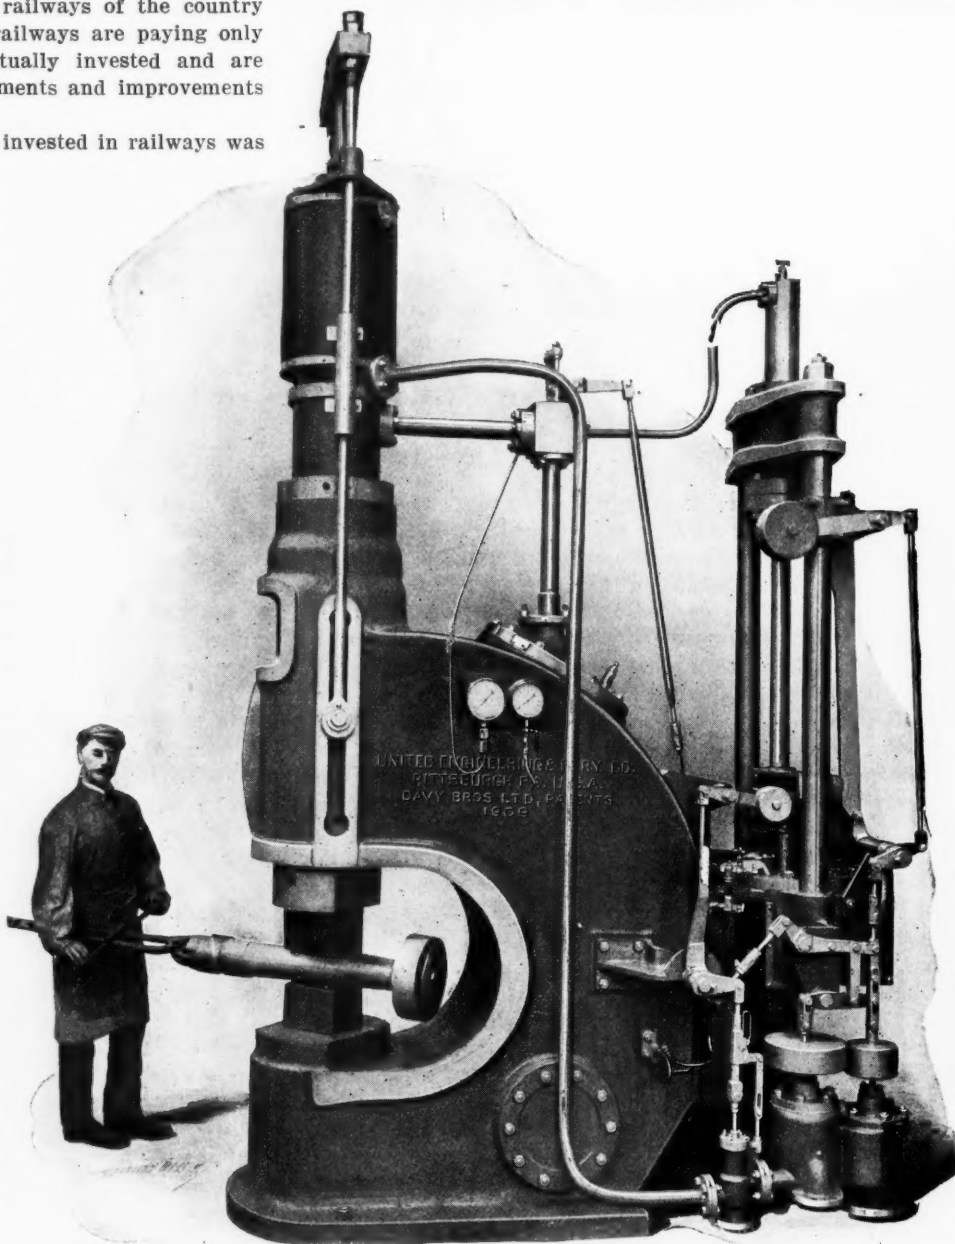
Rapid Action Steam-Hydraulic Forging Press; Single Frame Type.
